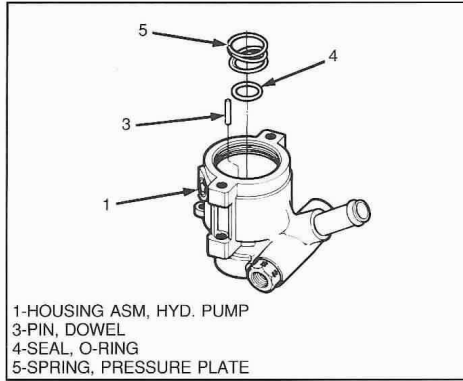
O-ring Seal, Spring, and Dowel Pin Installation
